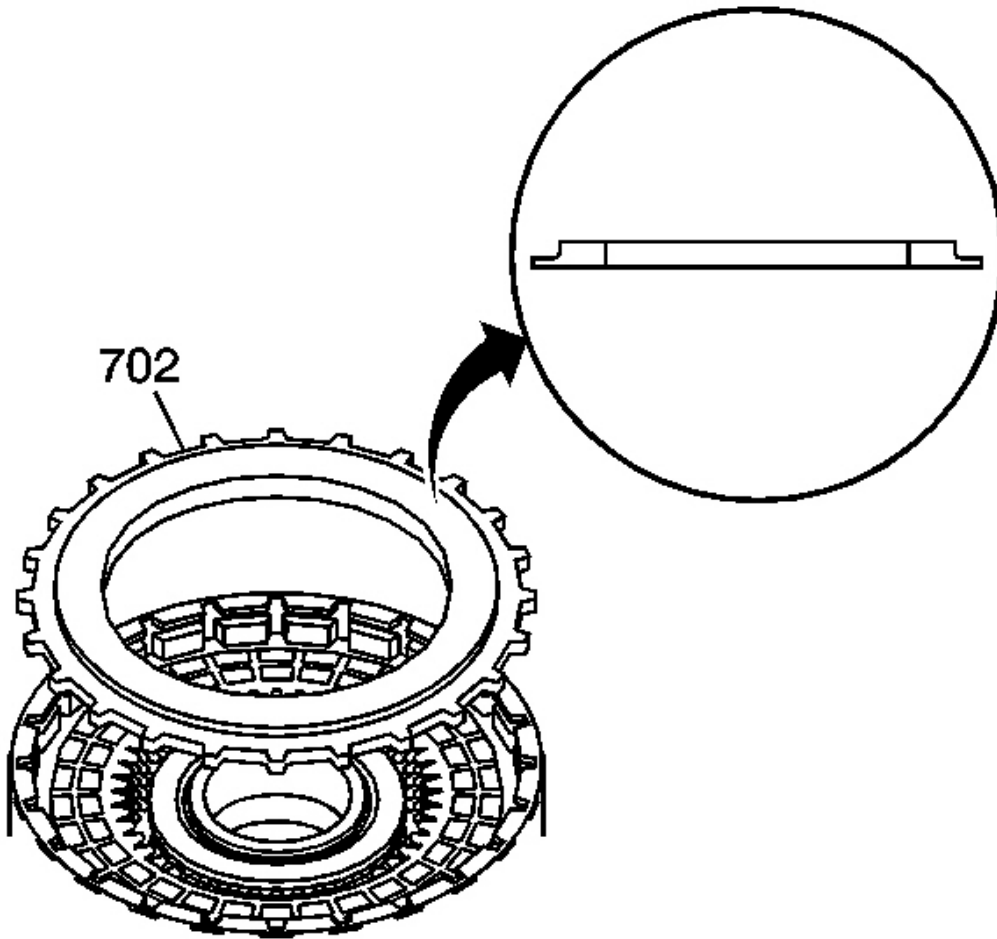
1st Clutch Backing Plate & 1st Clutch Fiber Plate
